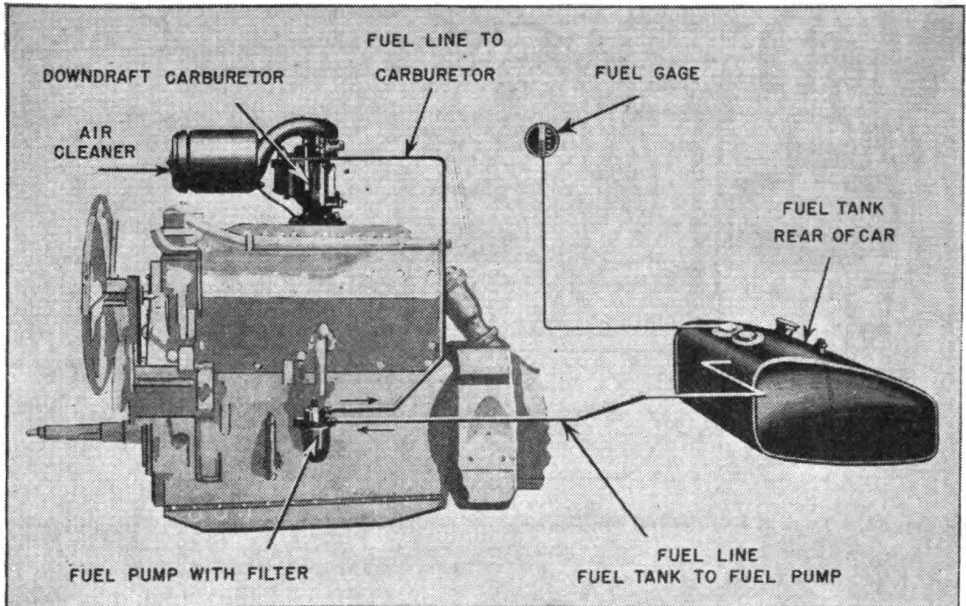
Typical fuel system for gasoline engine of motor vehicle.
